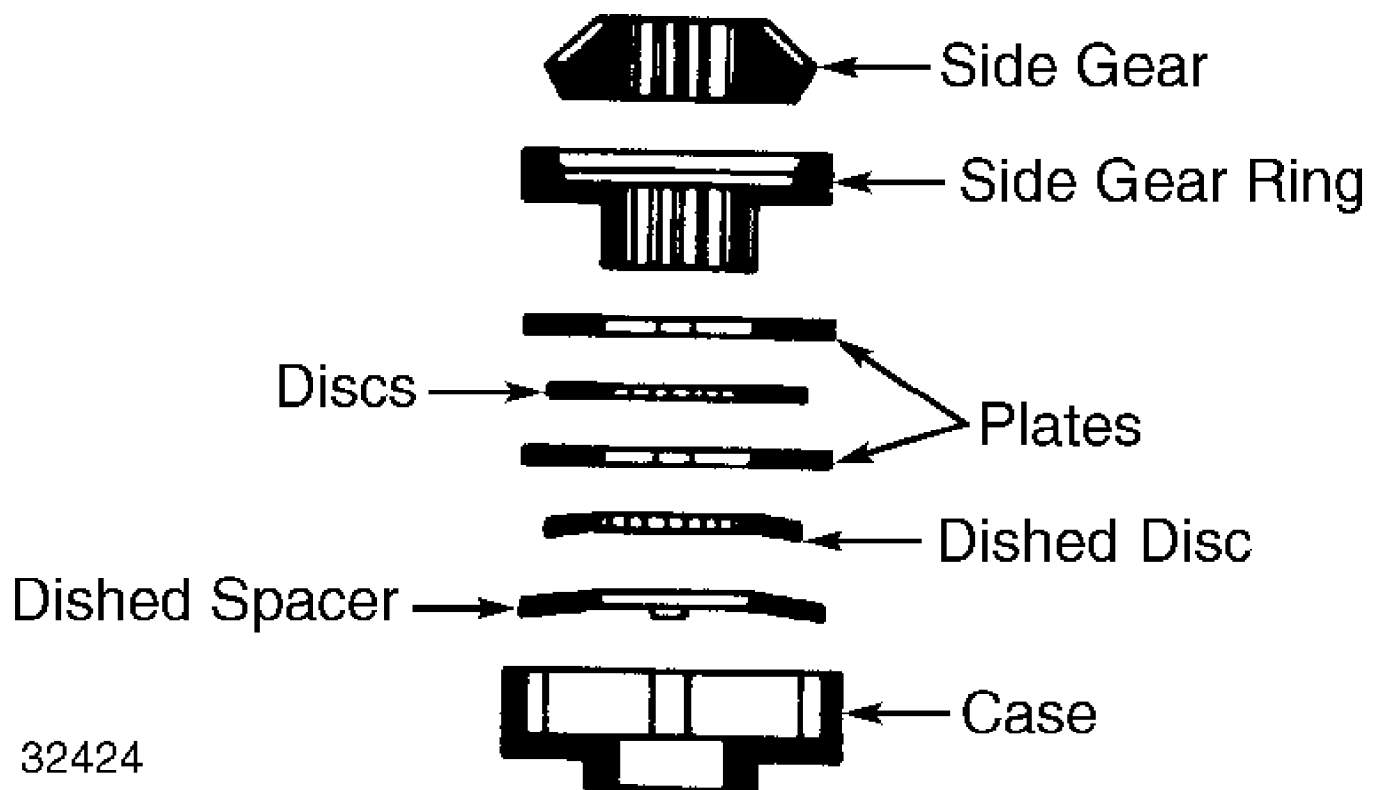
Power-Lok Differential Clutch Pack Assembly
